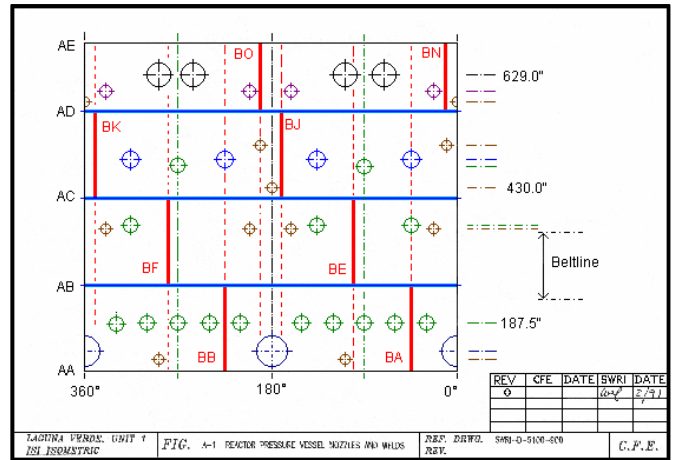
Vessel nozzles and welds of the Unit-1 vessel [18].
